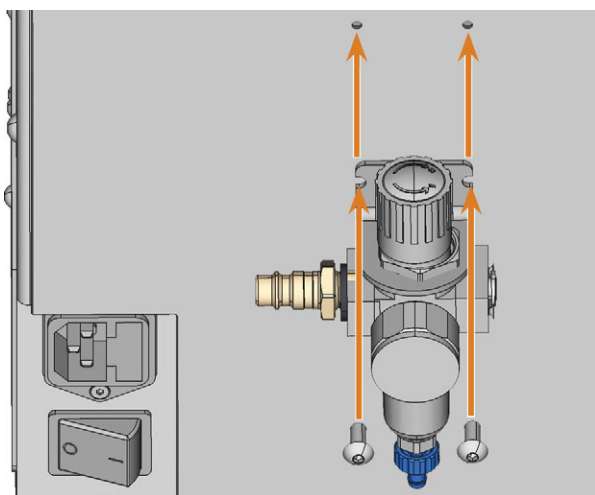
MOUNTING THE COMPRESSED AIR REGULATOR
